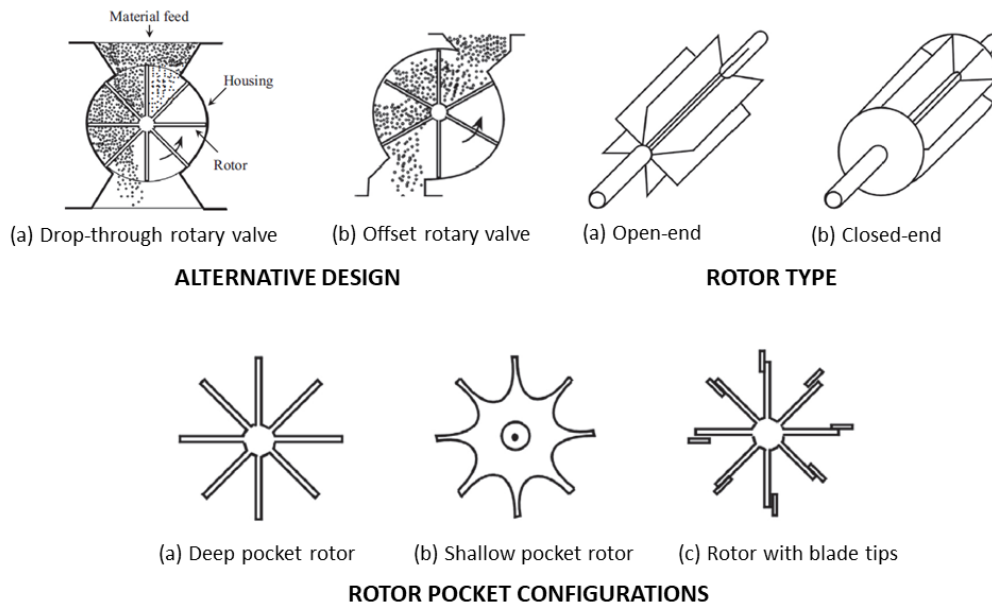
Schematic of a typical rotary valve feeder and common rotor geometries (Mills, 2016a)
